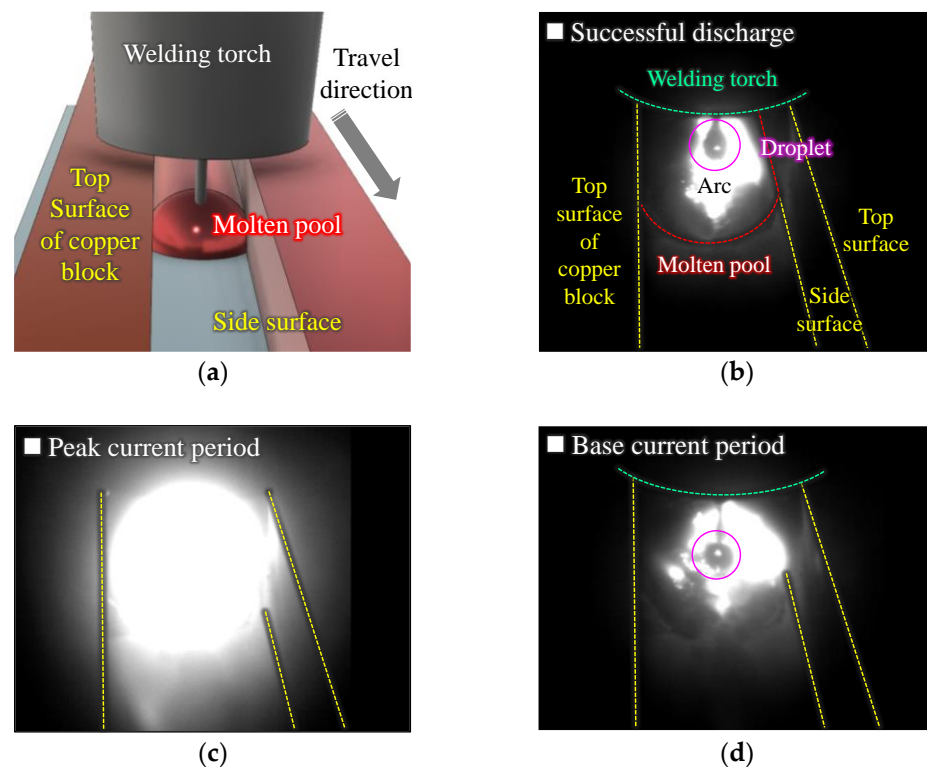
High-speed images of arc generation and droplet transfer using the conditions needed for sufficient penetration (space between copper blocks (W) = 14 [mm], average output voltage (U) = 22.4 [V], metal inert gas (MIG) welding contact tube to work distance ($CTWD$) = 18.5 [mm]). (a) Angle of view. (b) Growing droplet at the wire tip during base current period. (c) Peak current period. (d) A large droplet transferred to the molten pool.
